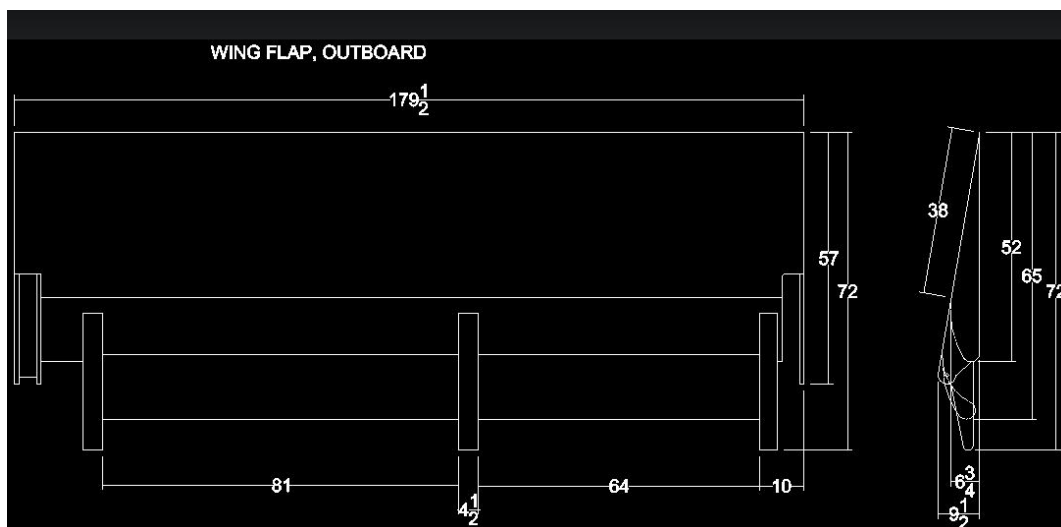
Dimensional Drawing of KC-135 Outboard Flap
